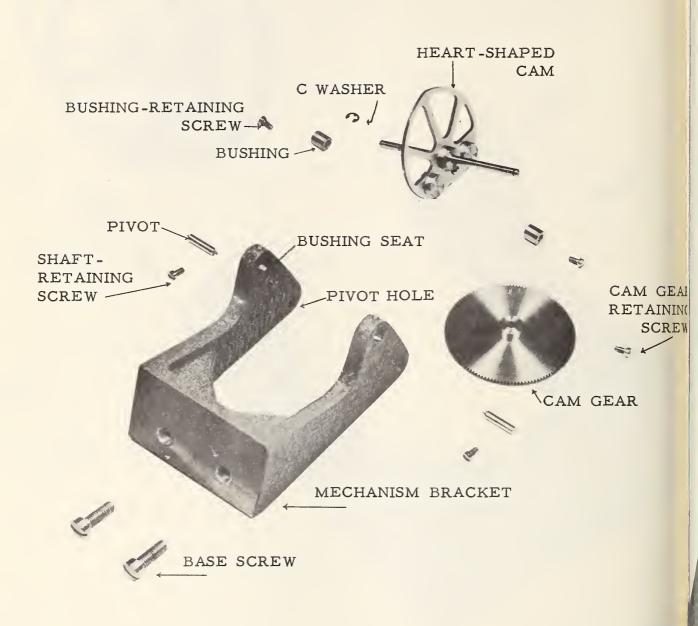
Type B. Mechanism bracket and cam gear, detail of parts.
